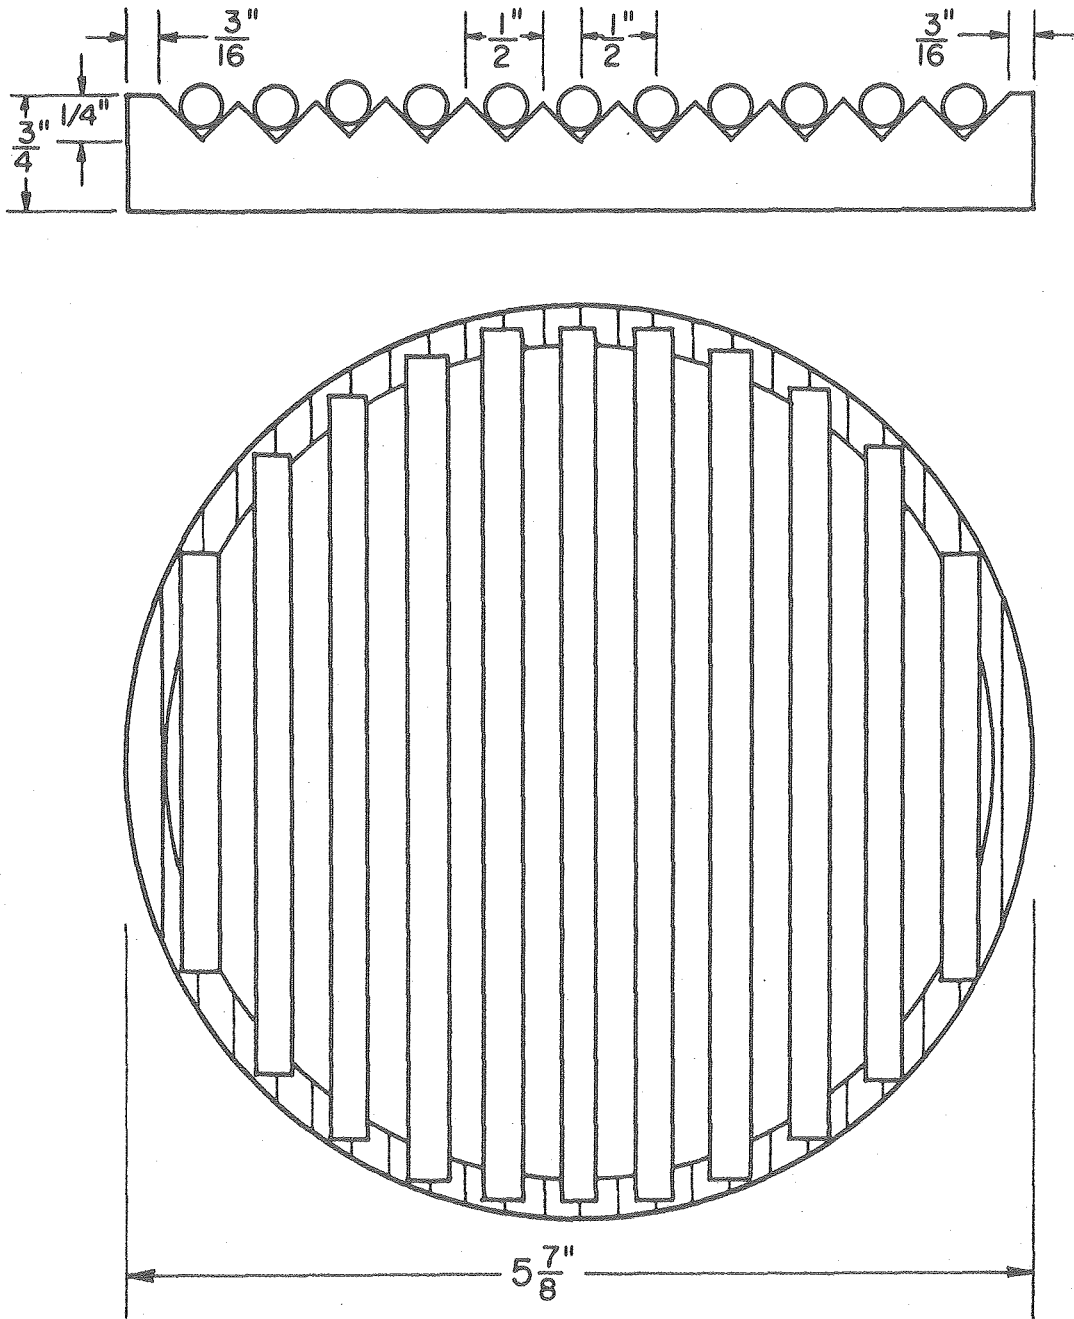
shows a gas sparger used in the gas holdup experiments. It consists of thin parallel disks, bottom fitted with a 3/8-inch internal pipe thread, fitting a nipple welded to the bottom flange. Use of a 3/8-inch orifice in certain runs simply indicates that sparger-less operation is being used.
